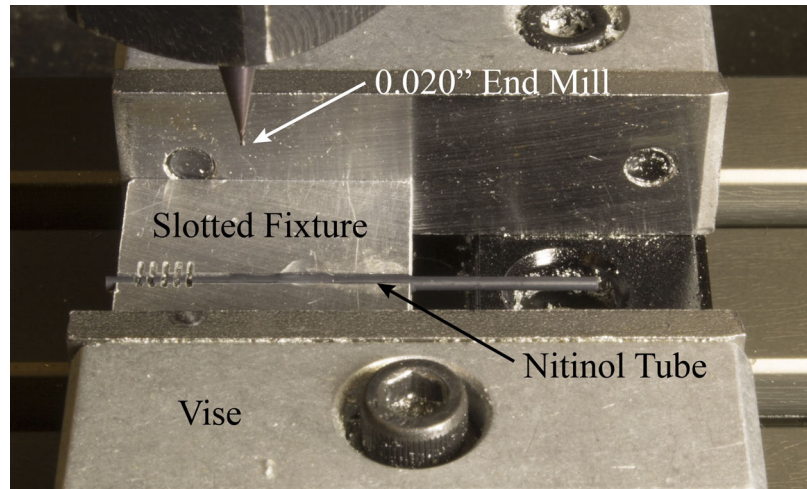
The fixturing setup used for the CNC manufacturing process. The slotted aluminum fixture used to make the wrists, with a nitinol tube glued into the fixture, is held in place by the CNC vise.
